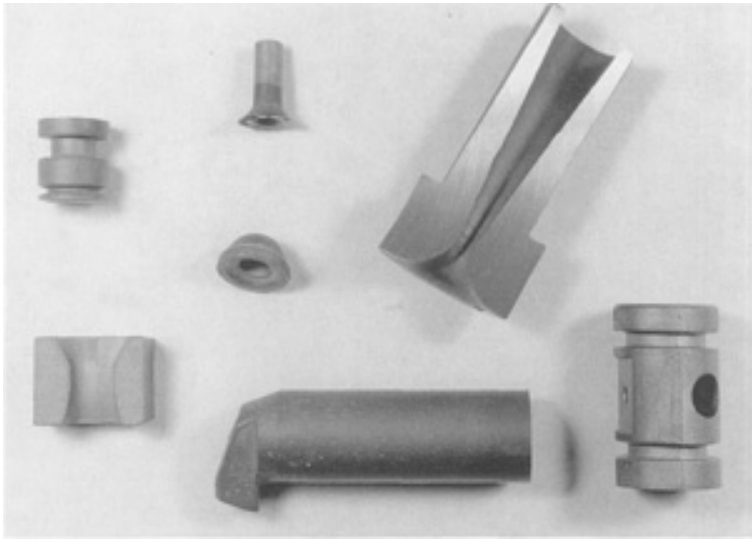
Some wear components formed by powder injection molding out of cemented carbides
